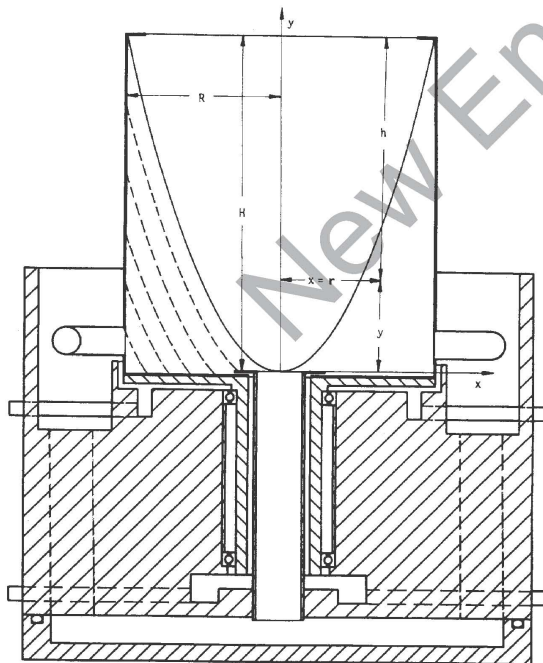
Technical drawing of the Segner-Marinov turbine.
